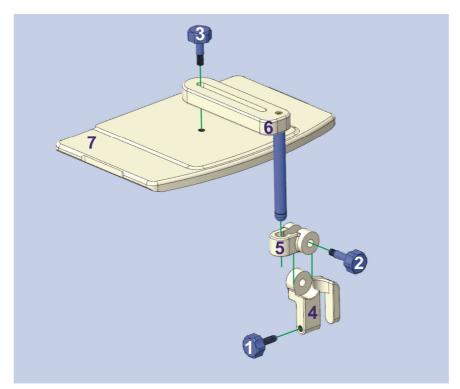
ER Coil Support assembly in "Coil HLD" setup.
